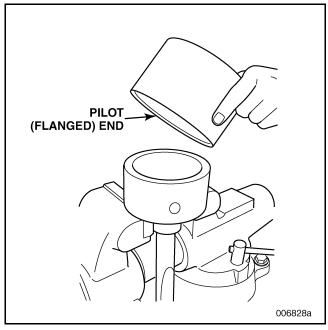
Placing Seal Sizer/Piston Installer (Tool No. J 47359) on Cylinder Housing
